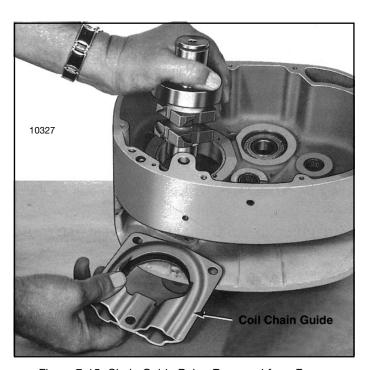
Chain Guide Being Removed from Frame as Sprocket Shaft is Lifted Out
